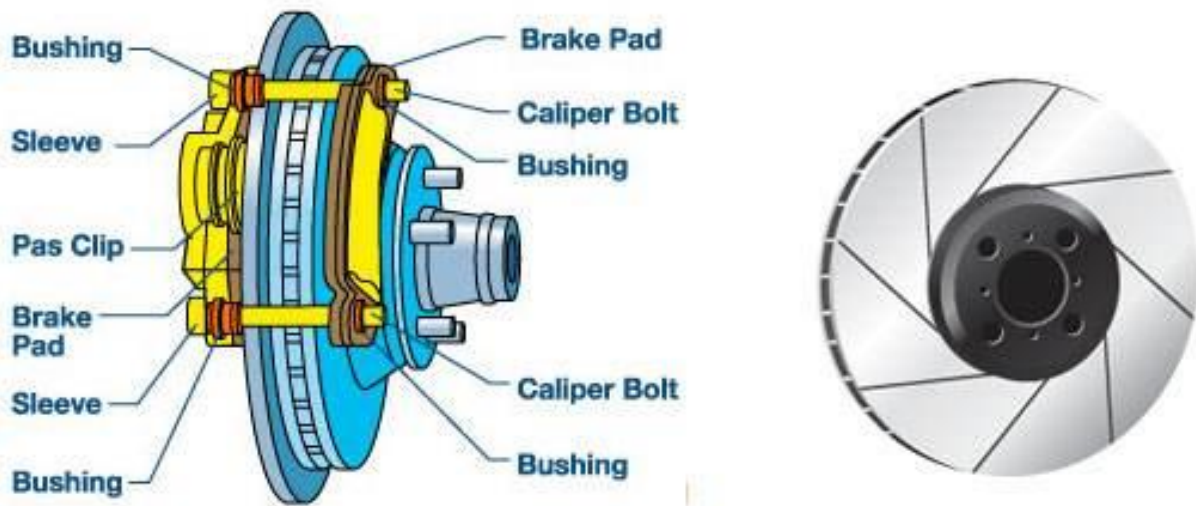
Schematic diagram of a brake disc/pad assembly with accessories
